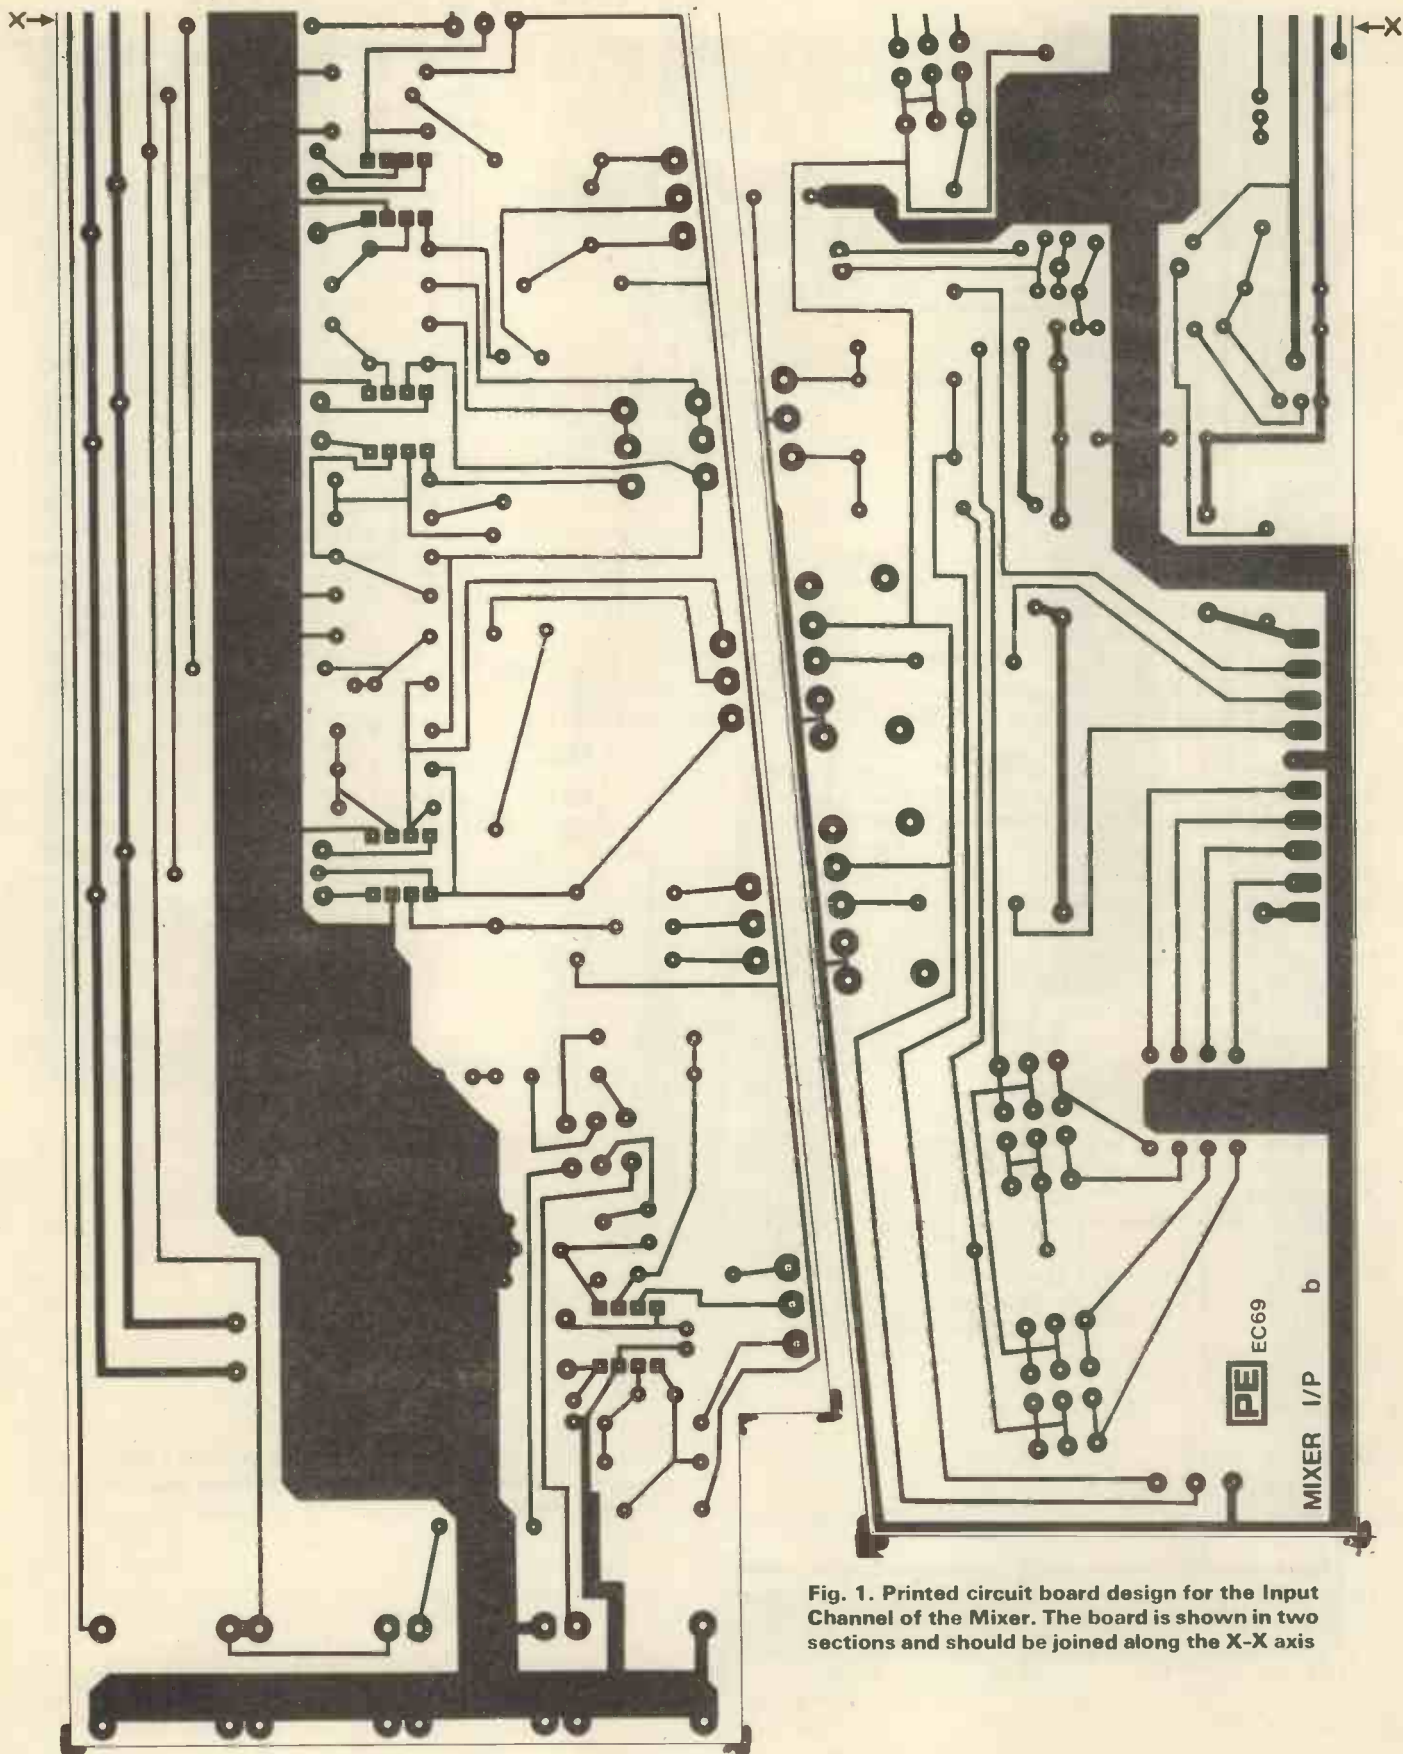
Printed circuit board design for the Input Channel of the Mixer. The board is shown in two sections and should be joined along the X-X axis
